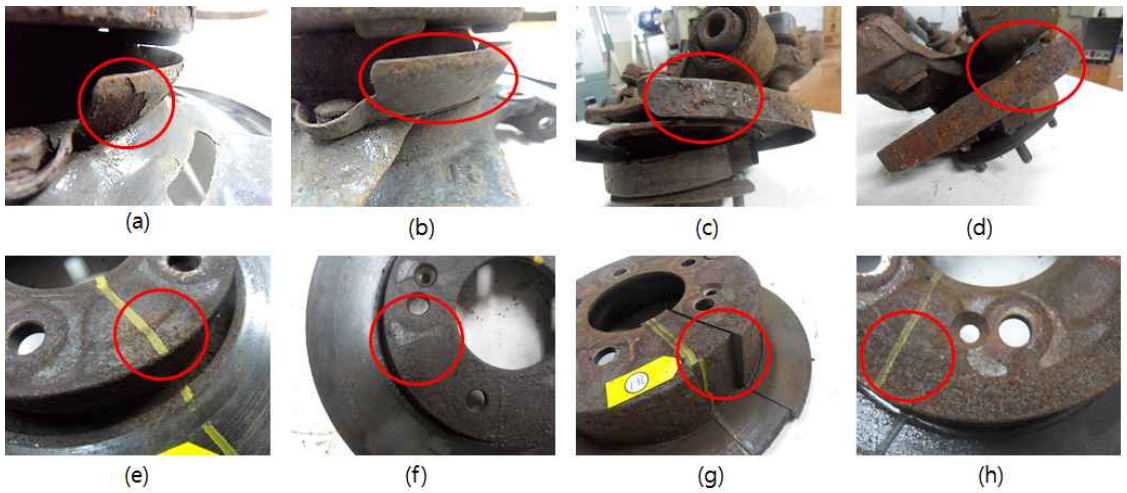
Brake disc: (a) D.C FRT-LEFT, (b) D.C FRT-RIGHT, (c) D.C RR-LEFT, (d) D.C RR-RIGHT, (e) DISC FRT-LEFT, (f) DISC FRT-RIGHT, (g) DISC RR-LEFT and (h) DISC RR-RIGHT.
